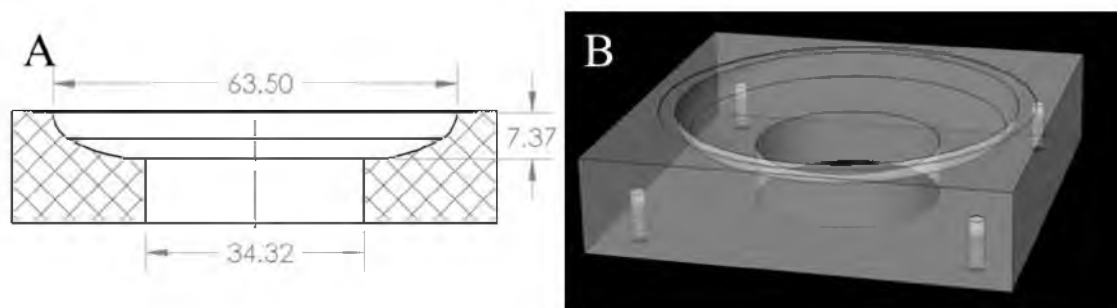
Curved reactor vessel bottom showing (A) cross-section dimensions (mm) and (B) perspective views.
